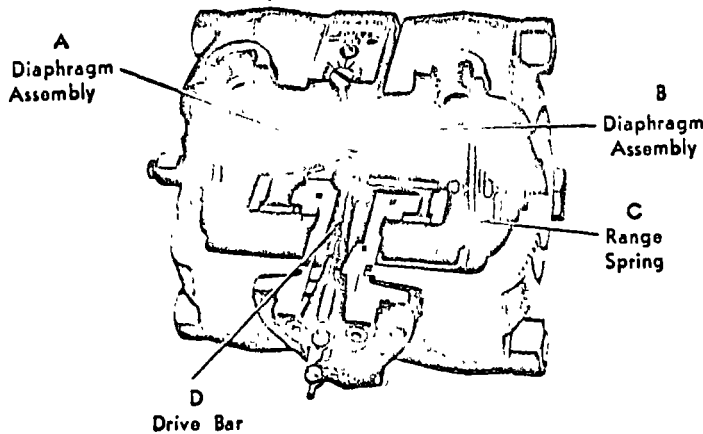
Cutaway view of M/37 element. Differential pressure increase compresses assembly A, displacing liquid to assembly B, which expands until differential pressure is balanced by range spring C, positioning instrument drive bar D.
